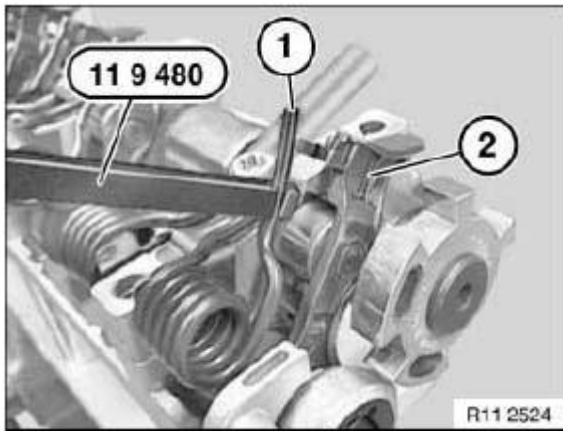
Identifying Torsion Spring And Intermediate Lever
